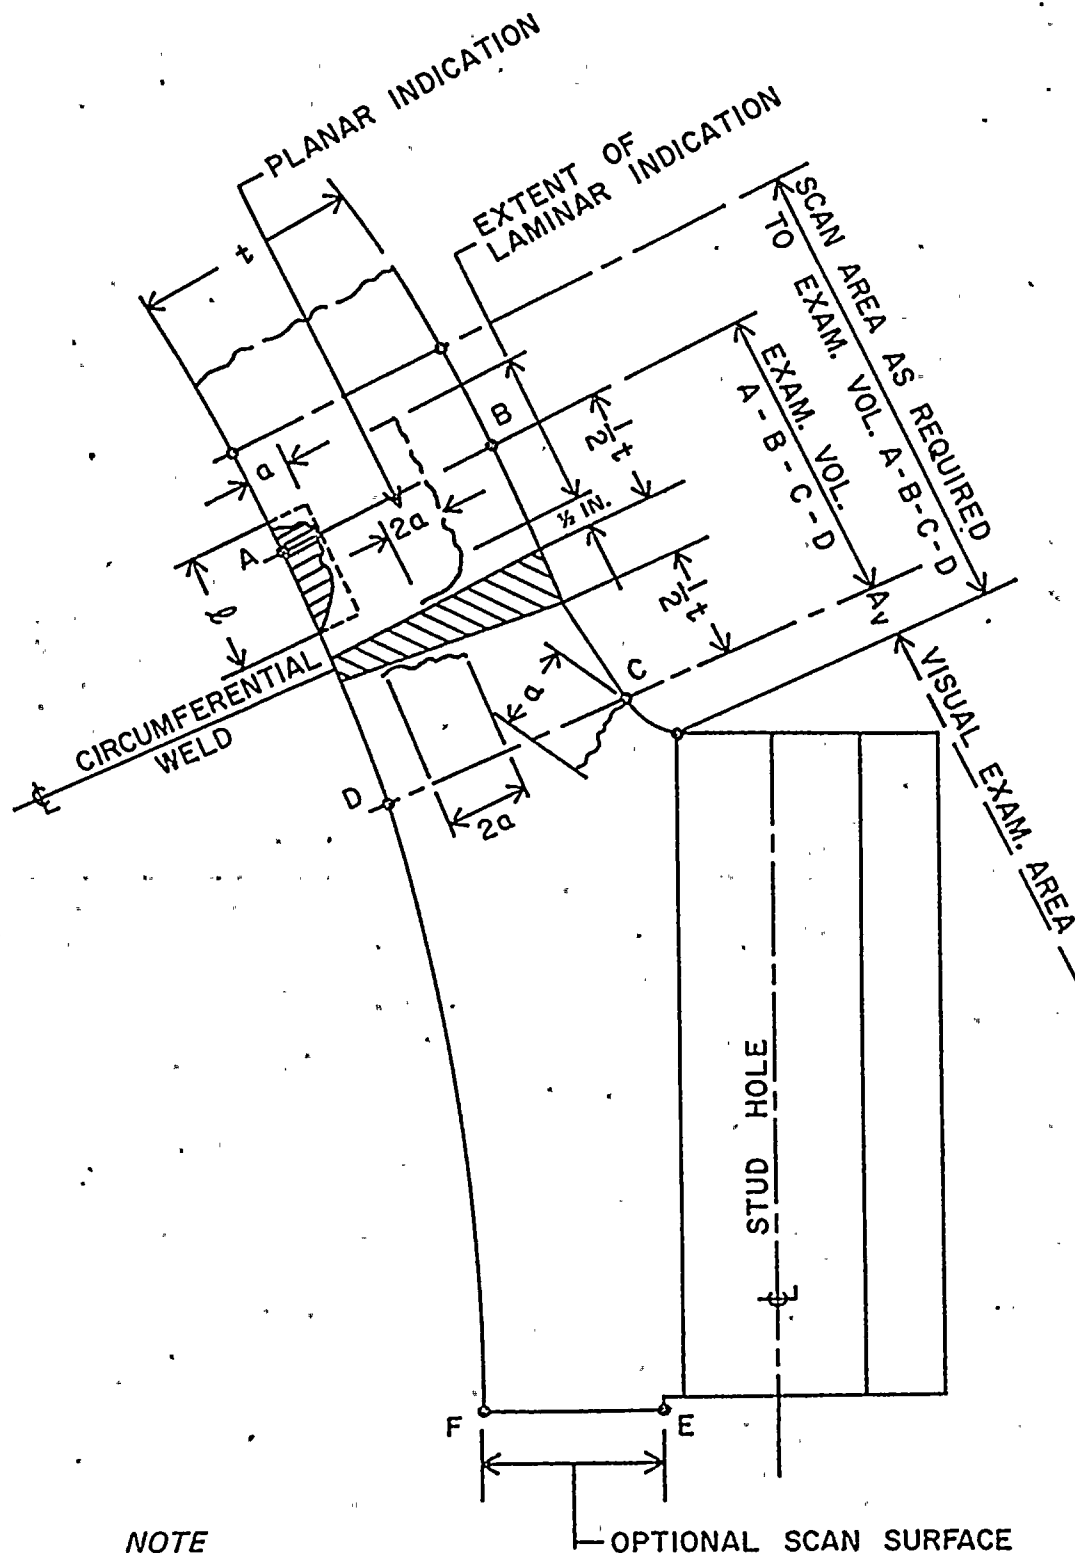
(d) SHELL-TO-FLANGE WELD JOINT
